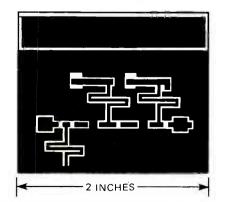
PREAMP IS CONSTRUCTED on doublesided PC board, only one side of which is etched.
